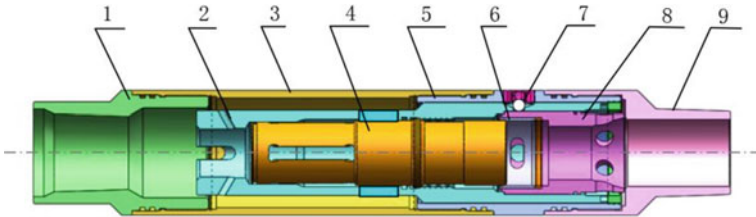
Structure of acid sprayer with micro-electric control switch. (1, upper joint 2, mandrel barrel 3, outer barrel 4, adjusting sleeve 5, transition joint 6, coordination body of adjusting sleeve 7, single-flow valve assembly 8, fixing sleeve 9, lower joint)
